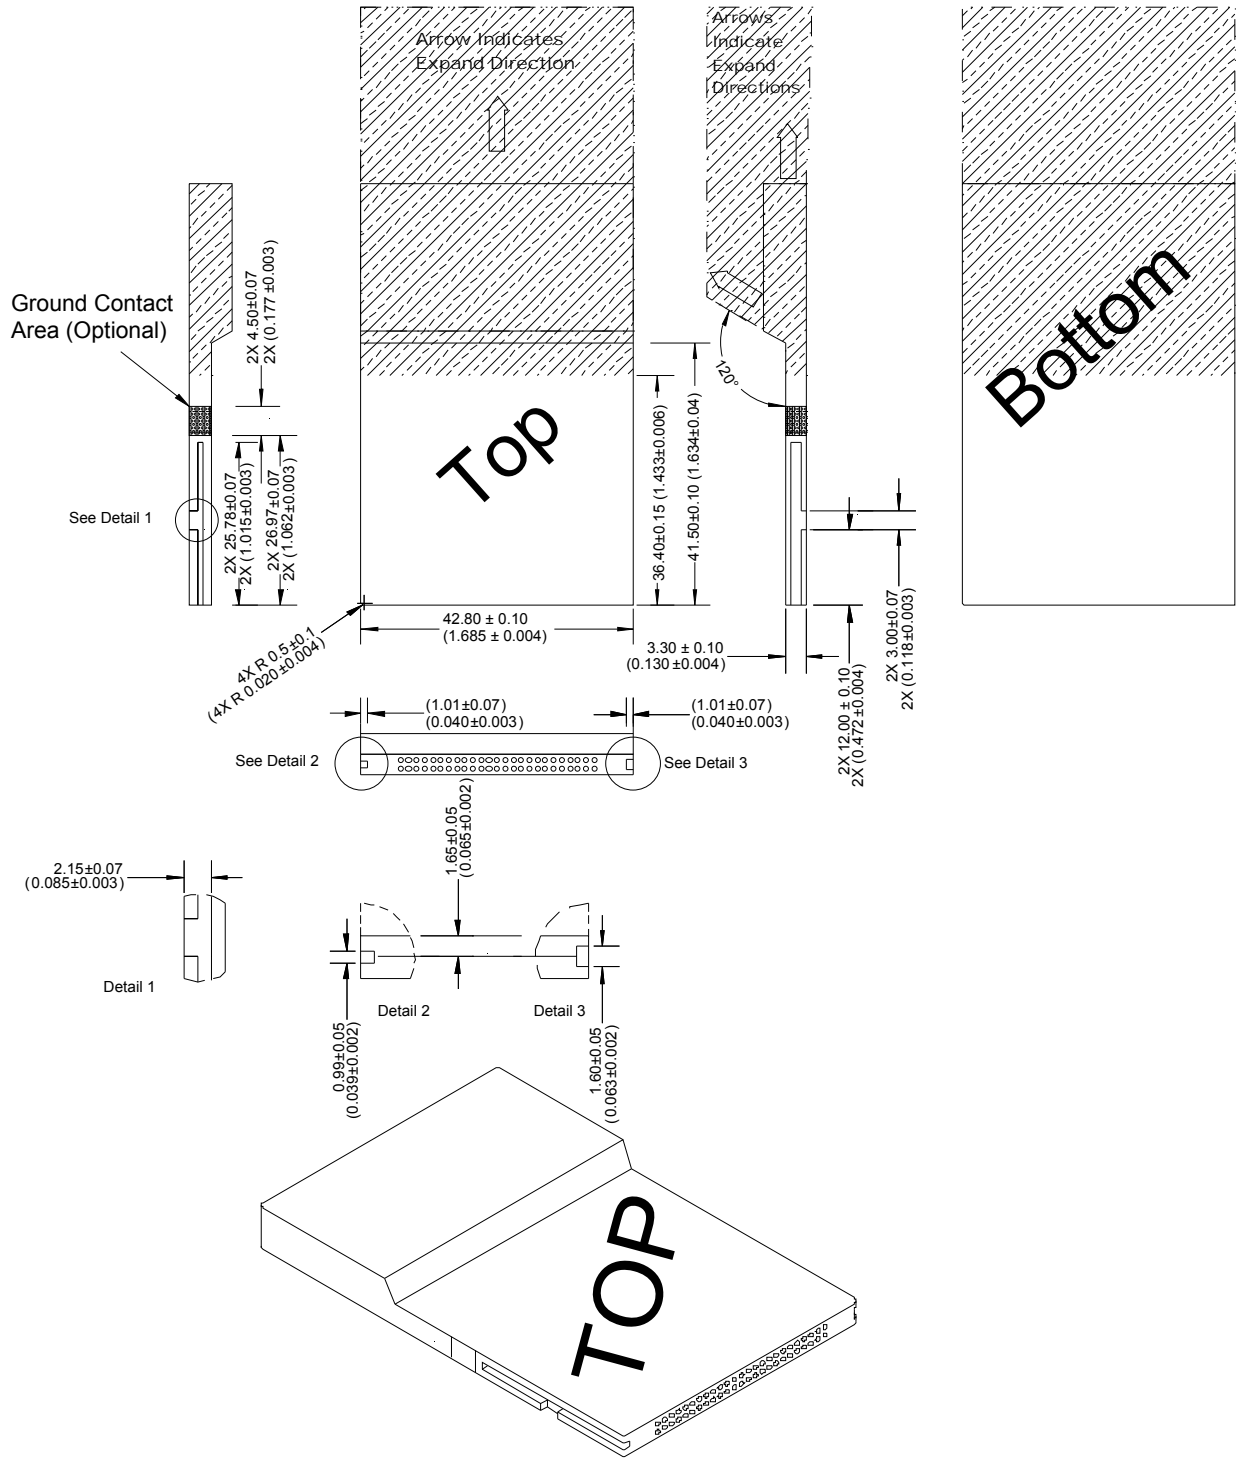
Longer Type I CompactFlash Storage Card and CF+ Card Dimensions
